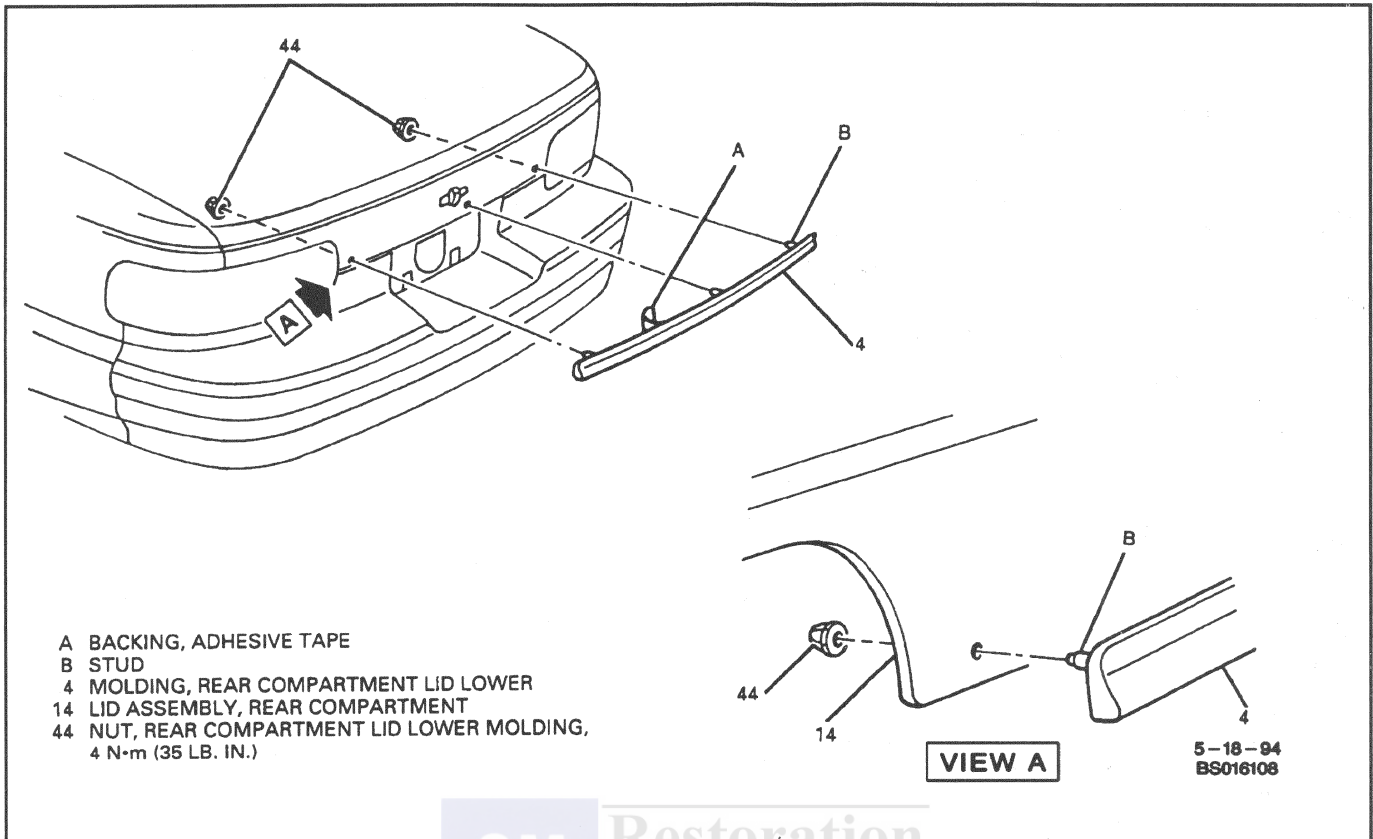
Rear Compartment Lid Lower Molding-(Chevrolet)
